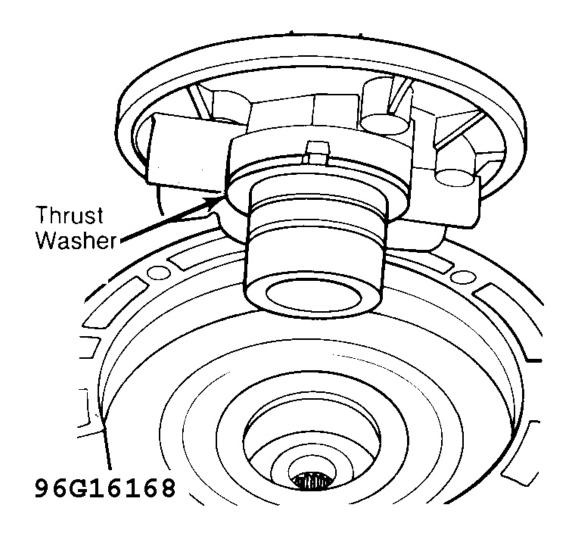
Installing Pump Into Case Courtesy of FORD MOTOR CO.
